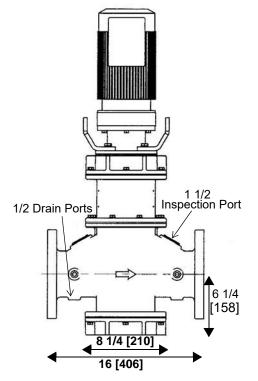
MUFFIN MONSTER 10000 6" SIDE DIMENSIONS
